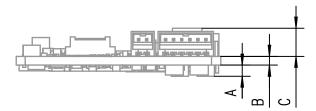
BR_XETK-S4.0 Dimensions - Side View
